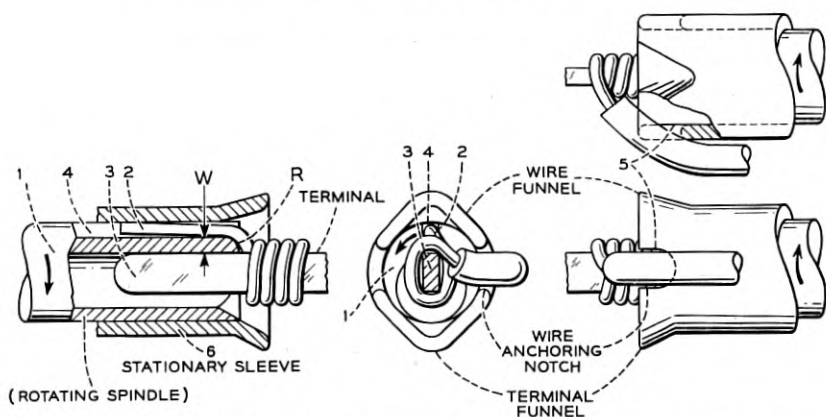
Method of wrapping the skinner wire on a rectangular terminal.
